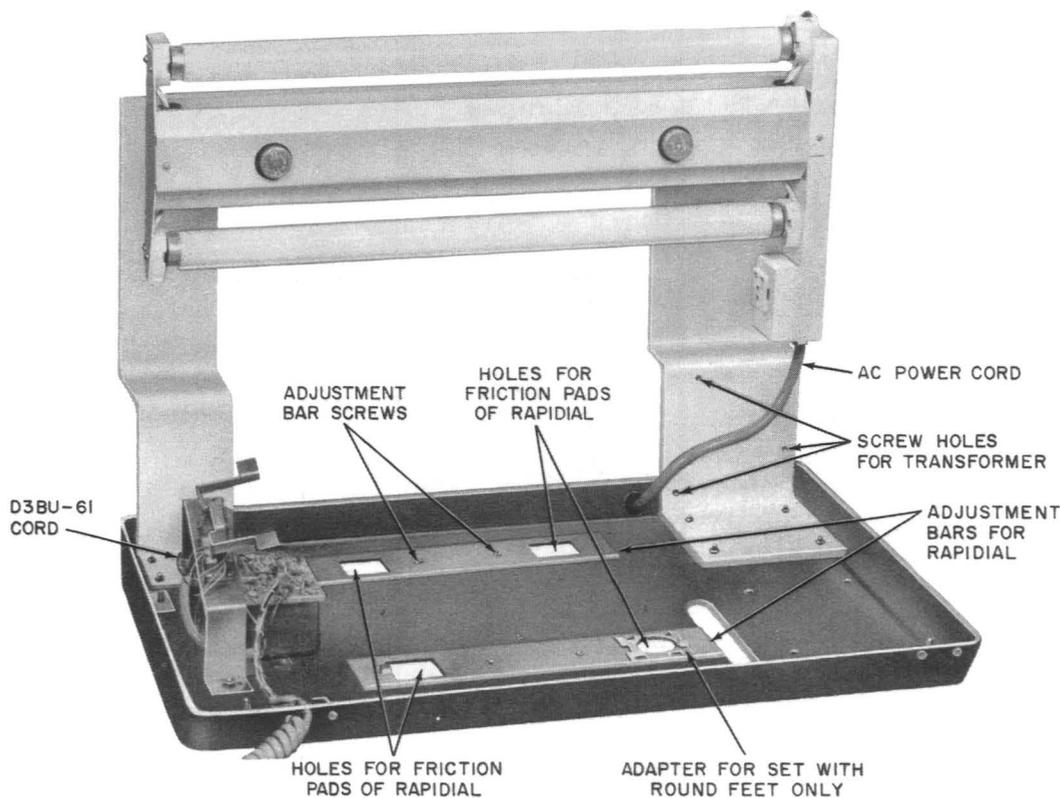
Interior View With RAPIDIAL and Transformer Removed
